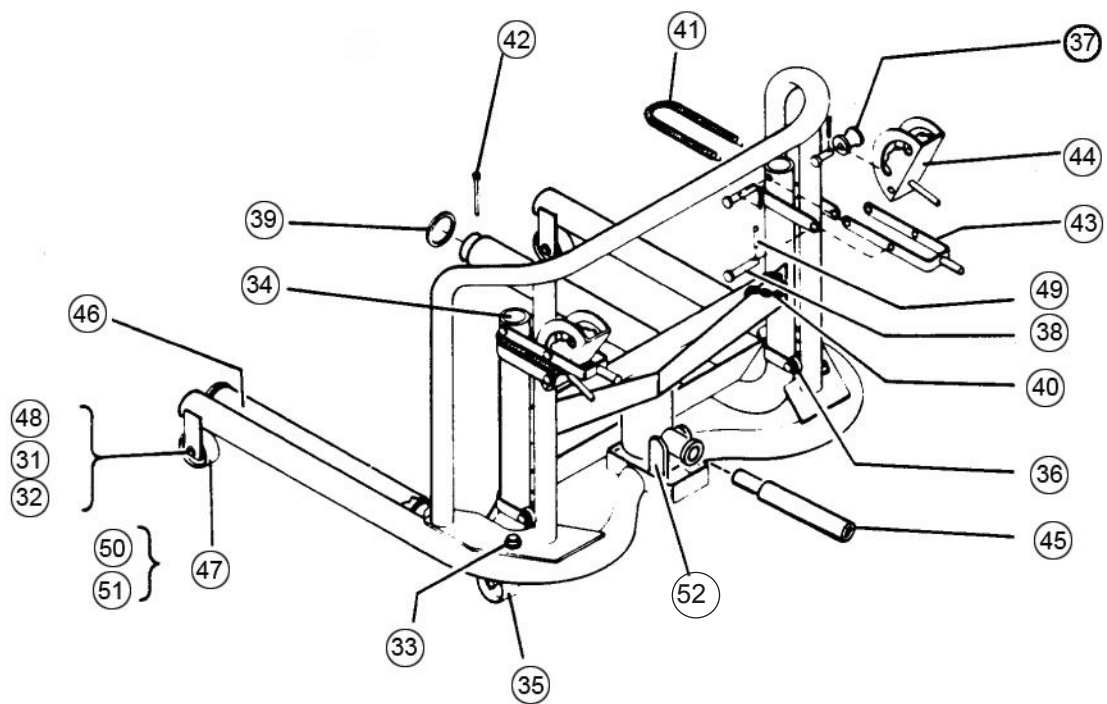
Parts Illustration for Wheel Dolly HW93765 - Main Frame
